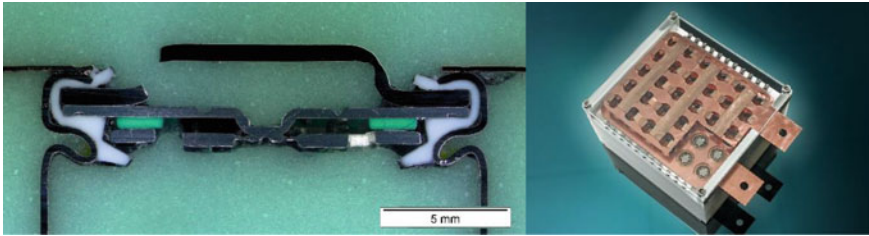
Cross section of cylindrical cell with laser welded copper connector (left), battery module with cylindrical cells (right)
